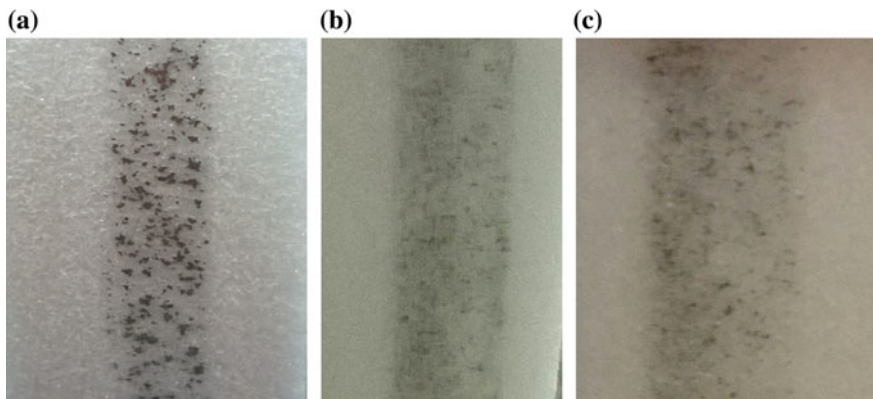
Images of the grinding wheel being loaded under a dry grinding, b using soap water jet, and c using liquid CO₂ assisted soap water jet
